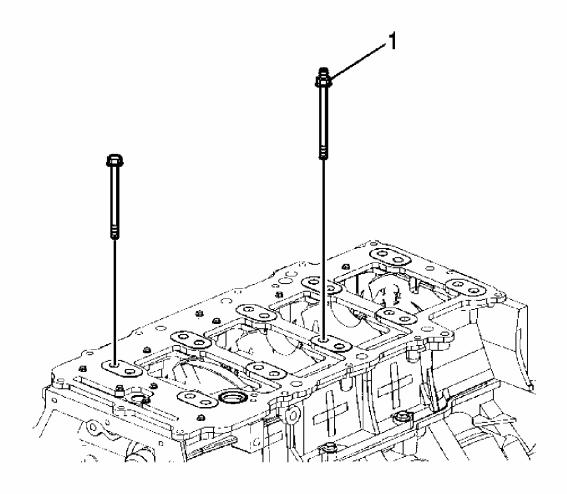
View Of Lower Crankcase Main Bearing Bolts Courtesy of GENERAL MOTORS CORP.
